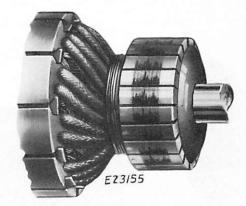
Badly Pitted Commutator—Check Armature For Short-Circuits, Must be Machined Out
